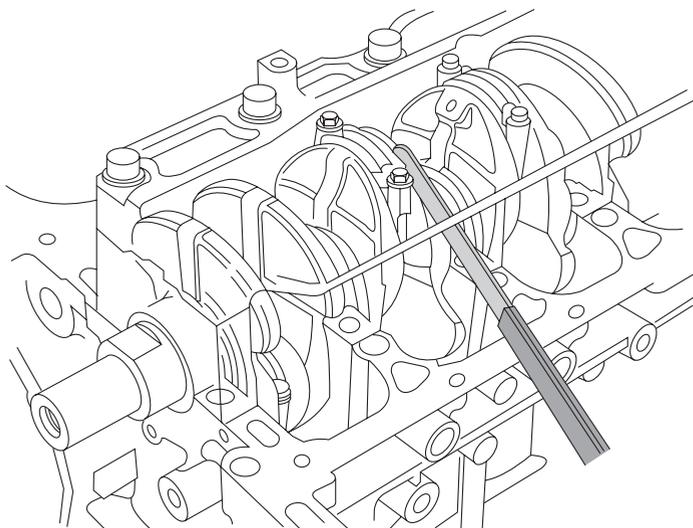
Measuring the crankshaft end play with a feeler gauge
